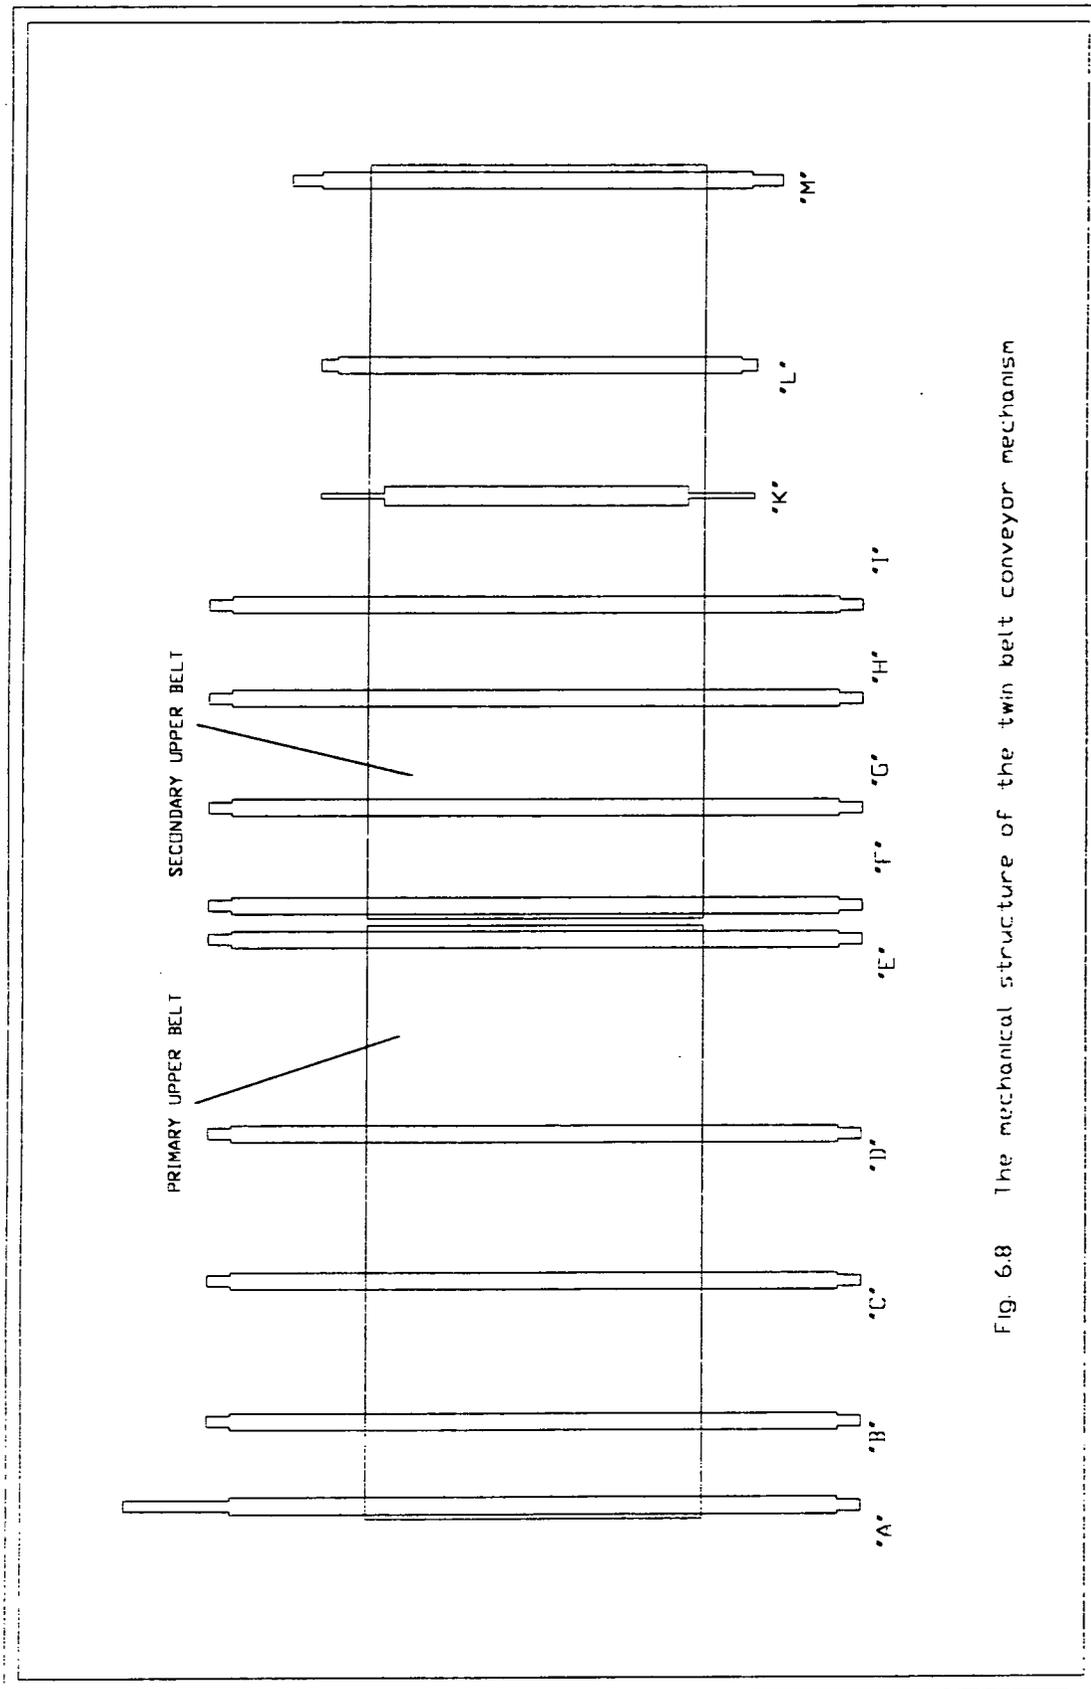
The mechanical structure of the twin belt conveyor mechanism
